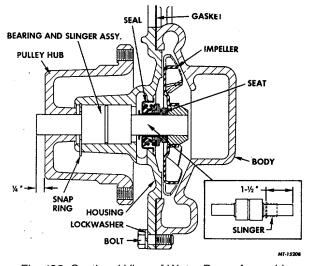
Sectional View of Water Pump Assembly. To disassemble the water pump, follow the steps outlined below.
